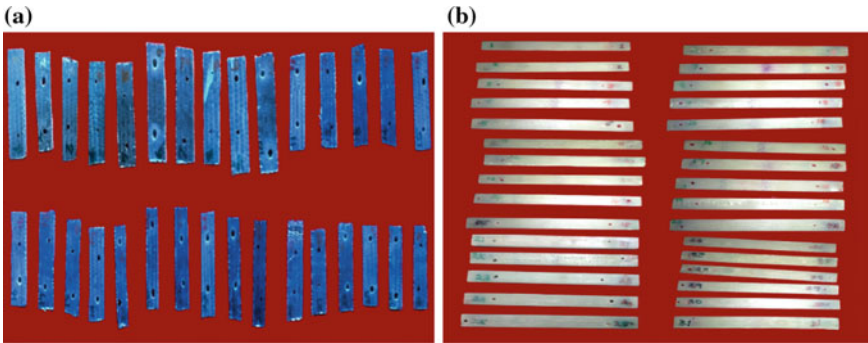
a CFRP samples after machining b GFRP samples after machining
